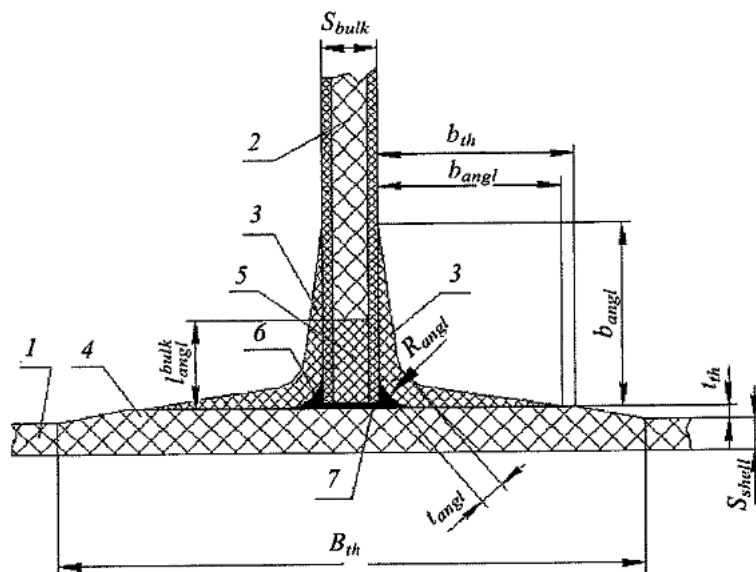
Joint of a sandwich bulkhead with a single-skin hull shell with reinforcement under the bulkhead:
